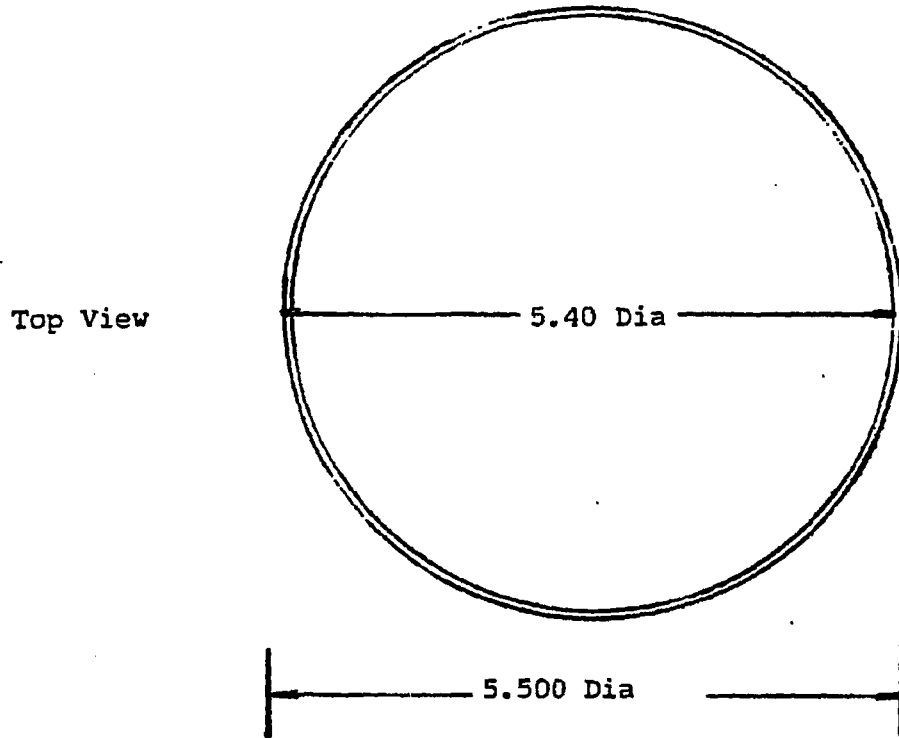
Top view of the outer Mu metal shield (see Photograph A.38).
